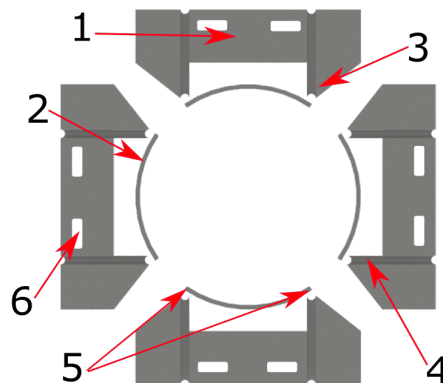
Geometry of the *Prototype 2.0* (not in scale with the real device). The main parts are labelled as follows: Holder (1), Heater (2), Triangular shaped part (3), Electrical wire guide (4), Contact pads (5), Metallic part with threads to fix the screw to the holder (6).
